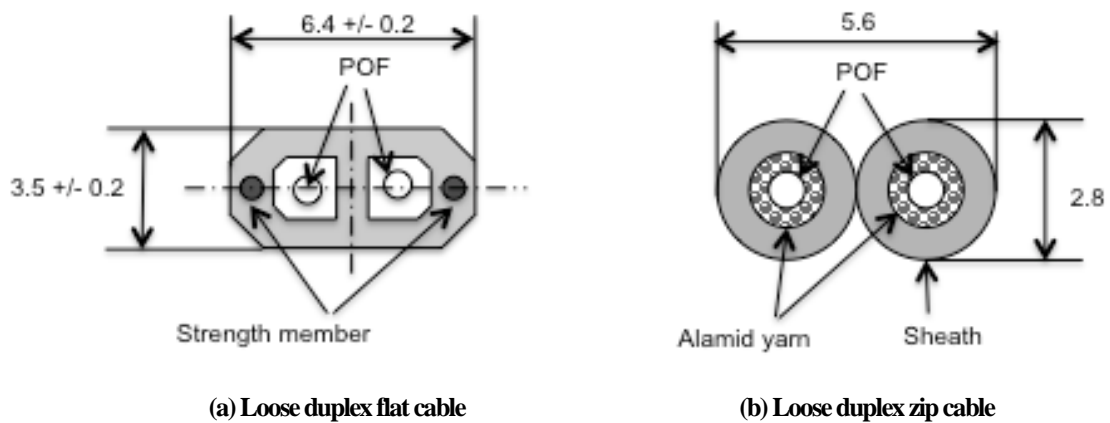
Cross sections of typical duplex cables for of fluoropolymer-type POFs (unit: mm) [8]
